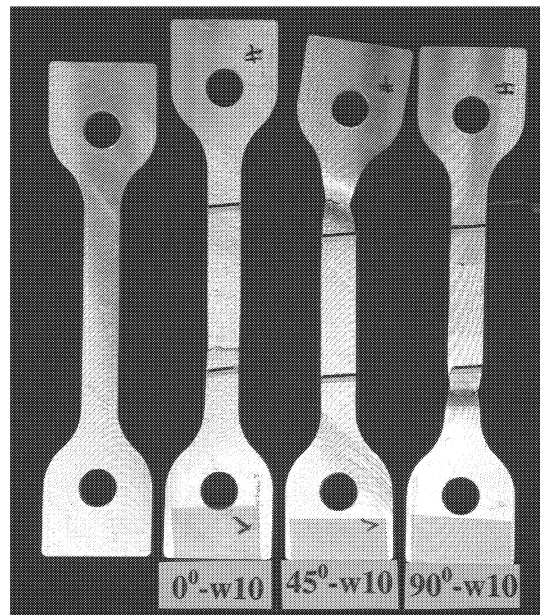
Fractured specimens: 0°-w10, 45°-w10, 90°-w10, and a virgin specimen.
